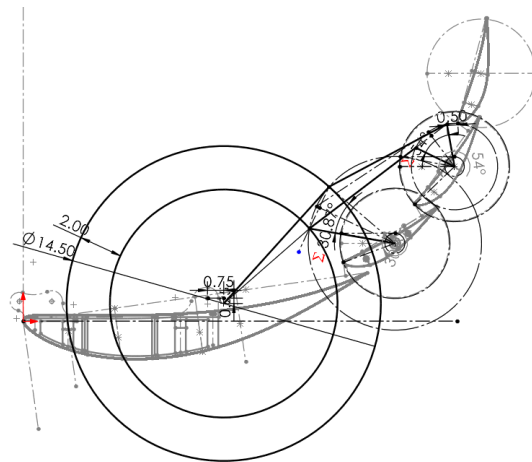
SolidWorks CAD of Mechanism Kinematic Sketch
